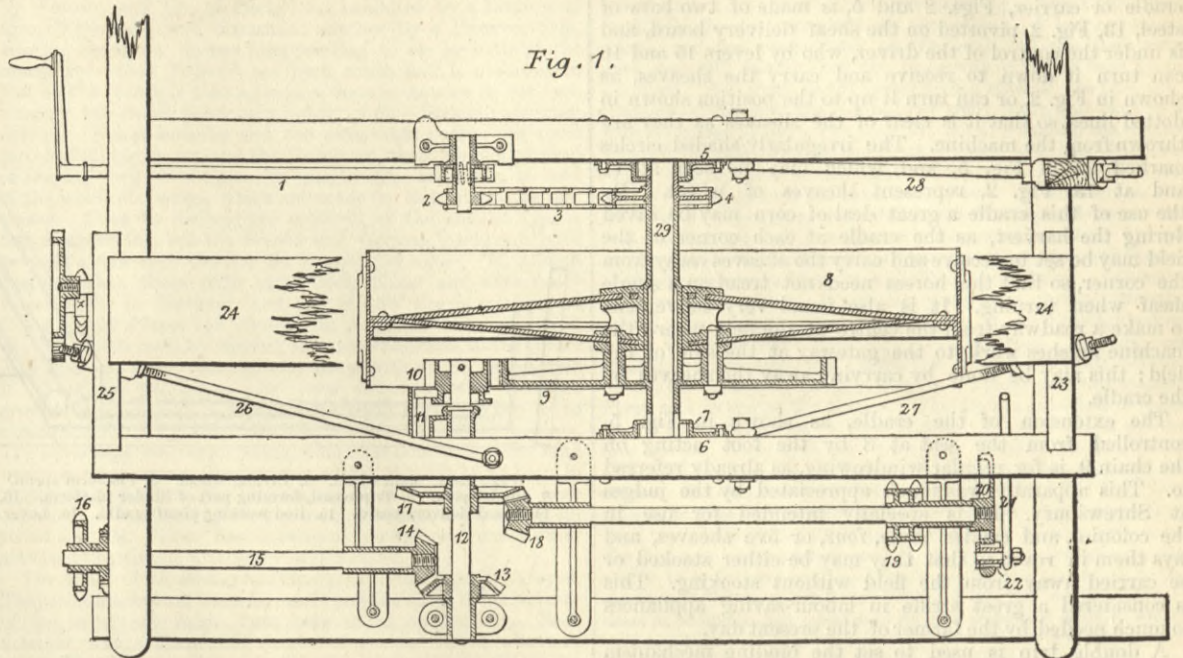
1. Spindle for raising worm. 2. Worm and chain wheel. 3. Raising chain (endless). 4. Chain wheel and raising pinion, made fast to axle 29. 5. Raising quadrant. 6. Ditto ditto. 7. Raising pinion, made fast to axle 29. 8. Main wheel. 9. Gear ring and bush in one piece. 10. Clutch pinion. 11. Clutch fork. 12. First-motion spindle. 13. Bevel wheel driving back spindle. 14. Bevel pinion, ditto ditto. 15. Back spindle. 16. Chain wheel driving elevator and platform aprons and reel. 17. Bevel wheel driving front spindle. 18. Bevel pinion, ditto ditto. 19. Double-chain wheel driving binder, on front spindle. 20. Crank plate. 21. Connecting rod. 22. Brass bush in crank plate. 23. Front elevator post. 24. Top board. 25. Back elevator board. 26. Back frame stay. 27. Front stay to front elevator post. 28. Front stay to tilting post. 29. Main axle.
